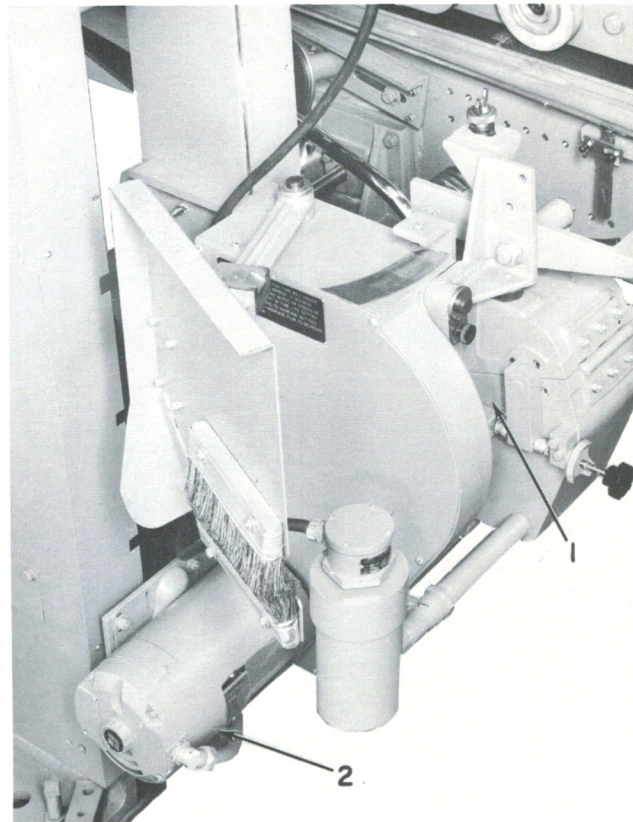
INSIDE-LAP GLUE UNIT LUBRICATION
